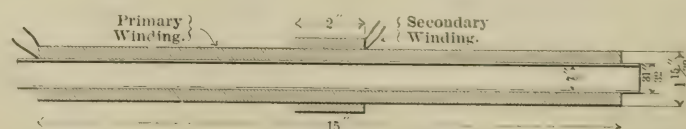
SECTION OF PRIMARY AND SECONDARY WINDING.
